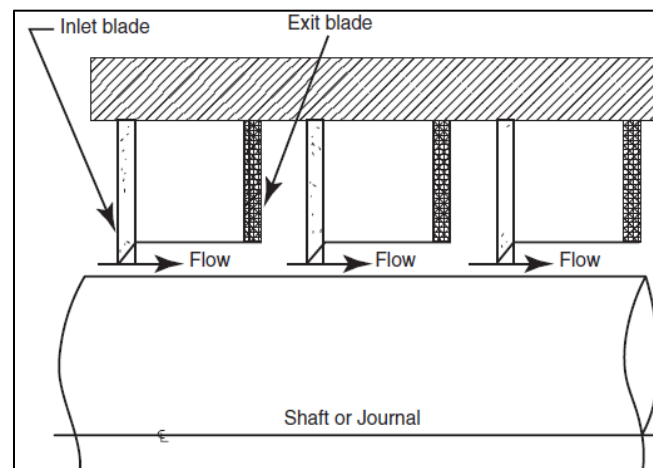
10 A six-bladed pocket damper seal (original design).[18]
